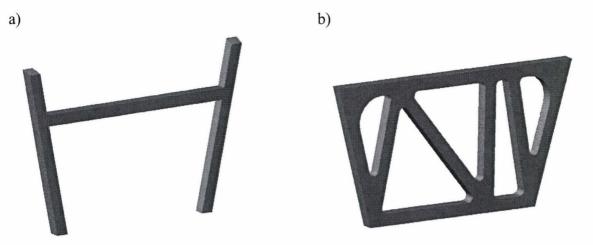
Straight frames a) front suspension frame b) rear frame
